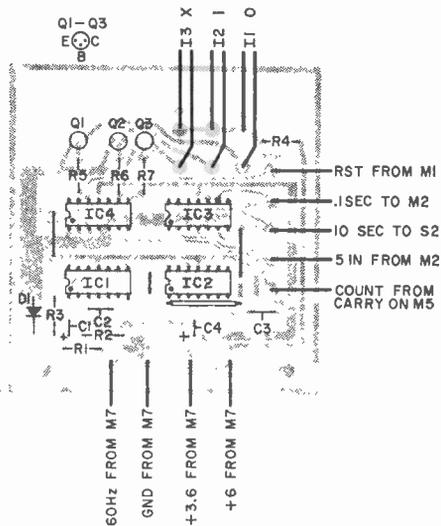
Mount the board components as shown here, once again taking care to observe all polarities.
